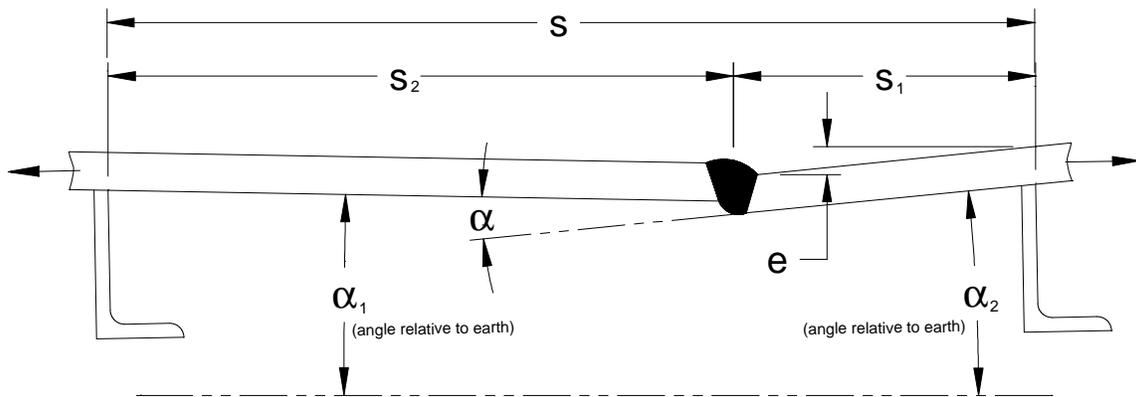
Butt-Welded Plate Angular Misalignment - Variables
